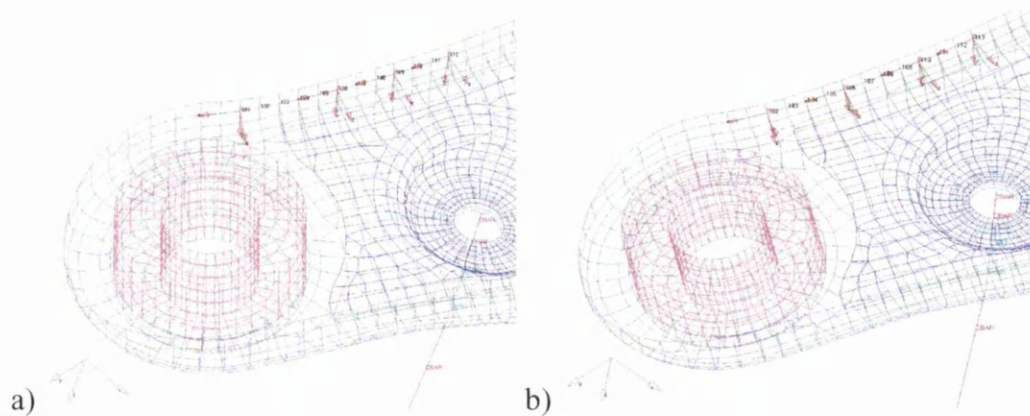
Local Coordinate Systems a) Full-Length Triangular Weld, b) Cut-Length Triangular Weld
